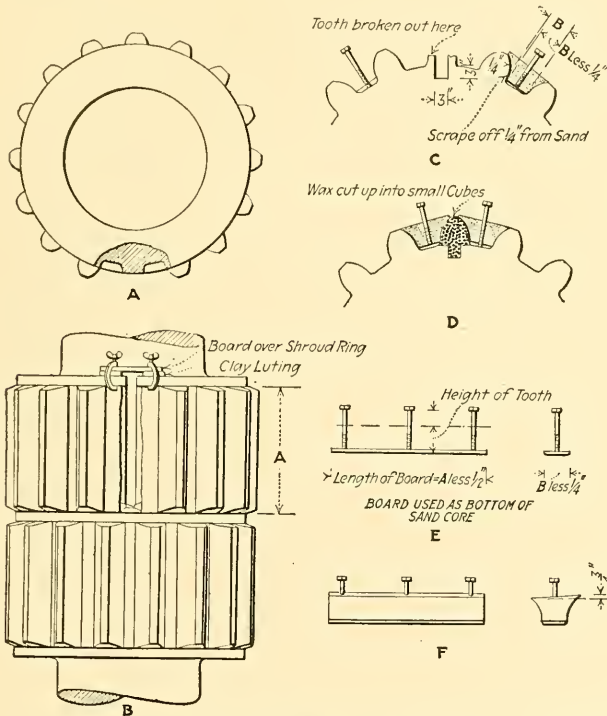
Recently Developed Method of Making Wax Tooth Pattern.
